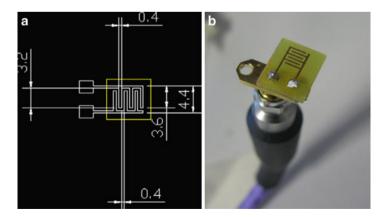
(a) CAD layout of Cu IDE pattern; (b) Cu IDE on FR4 substrate with SMA connector and N-type cable
